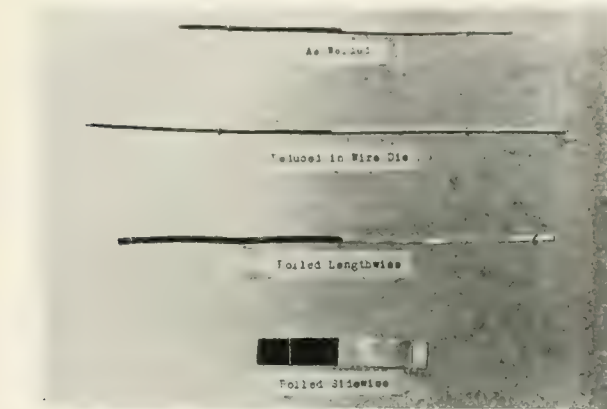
SAMPLES OF WELDS BETWEEN ALUMINUM AND COPPER
